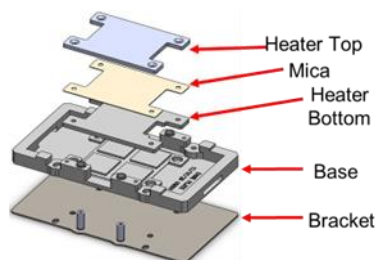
TTV DESIGN FOR COOLANT TESTING
